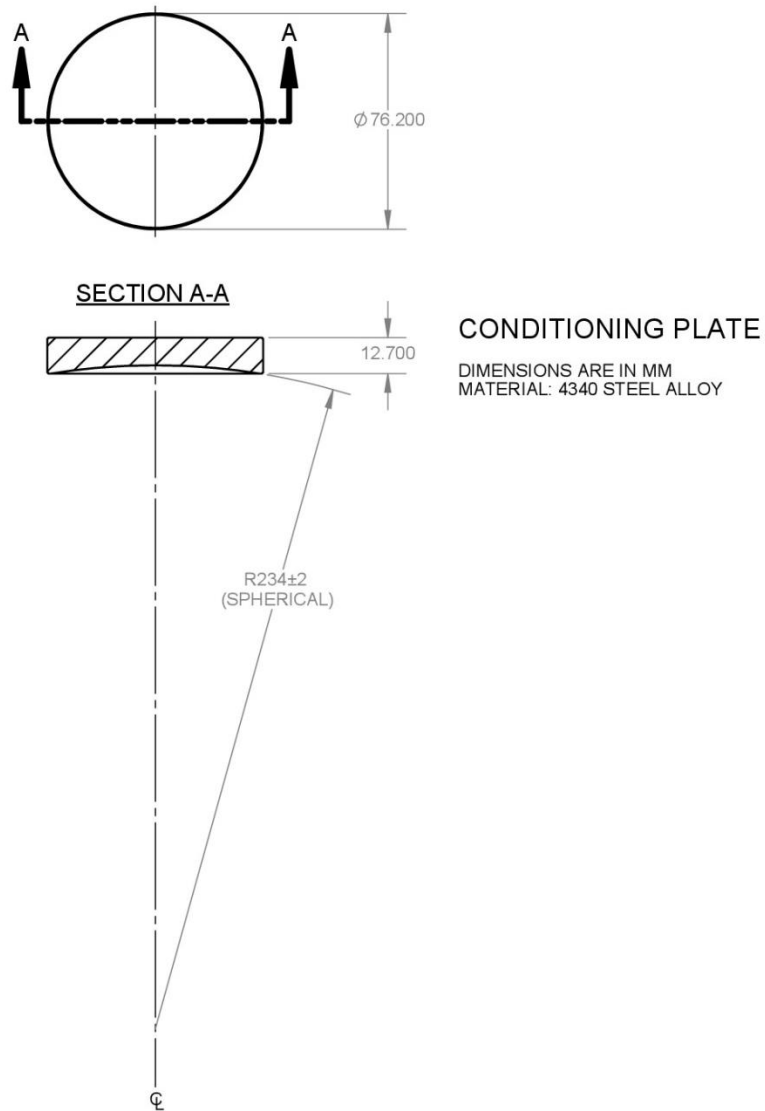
Mechanical drawing of the conditioning plate for making Sample 5 and Sample 6.
